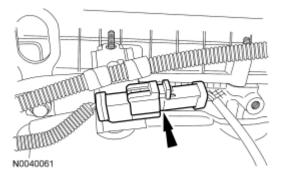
Locating Heated Oxygen Sensor (HO2S) Electrical Connector
